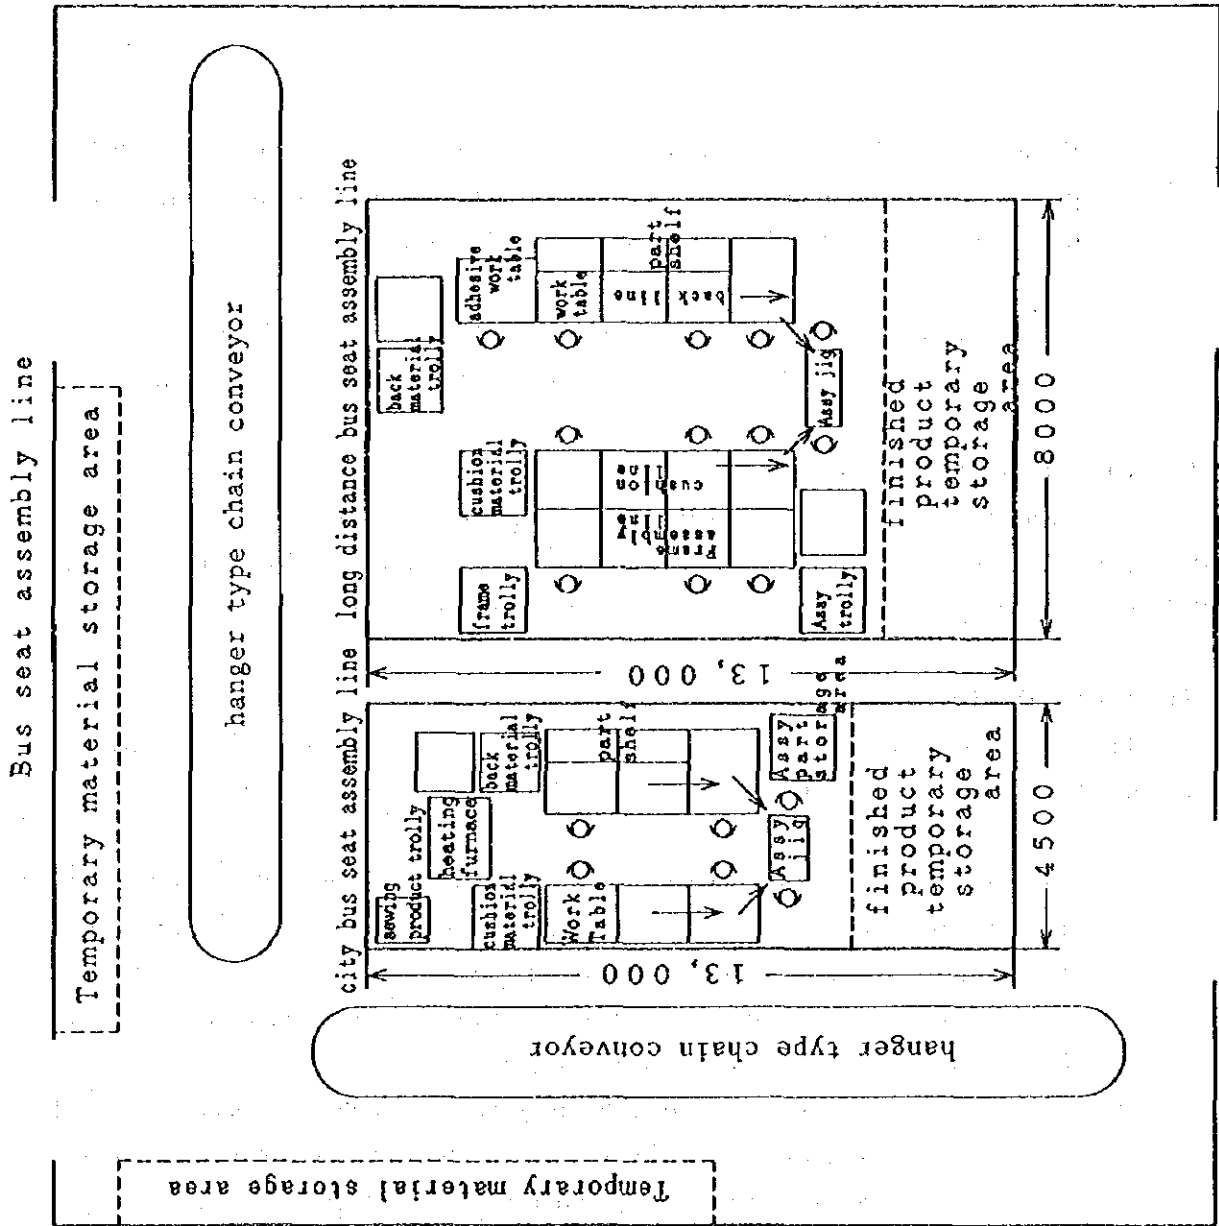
Suggested Layout of the Assembly Process without a Chain Conveyor
